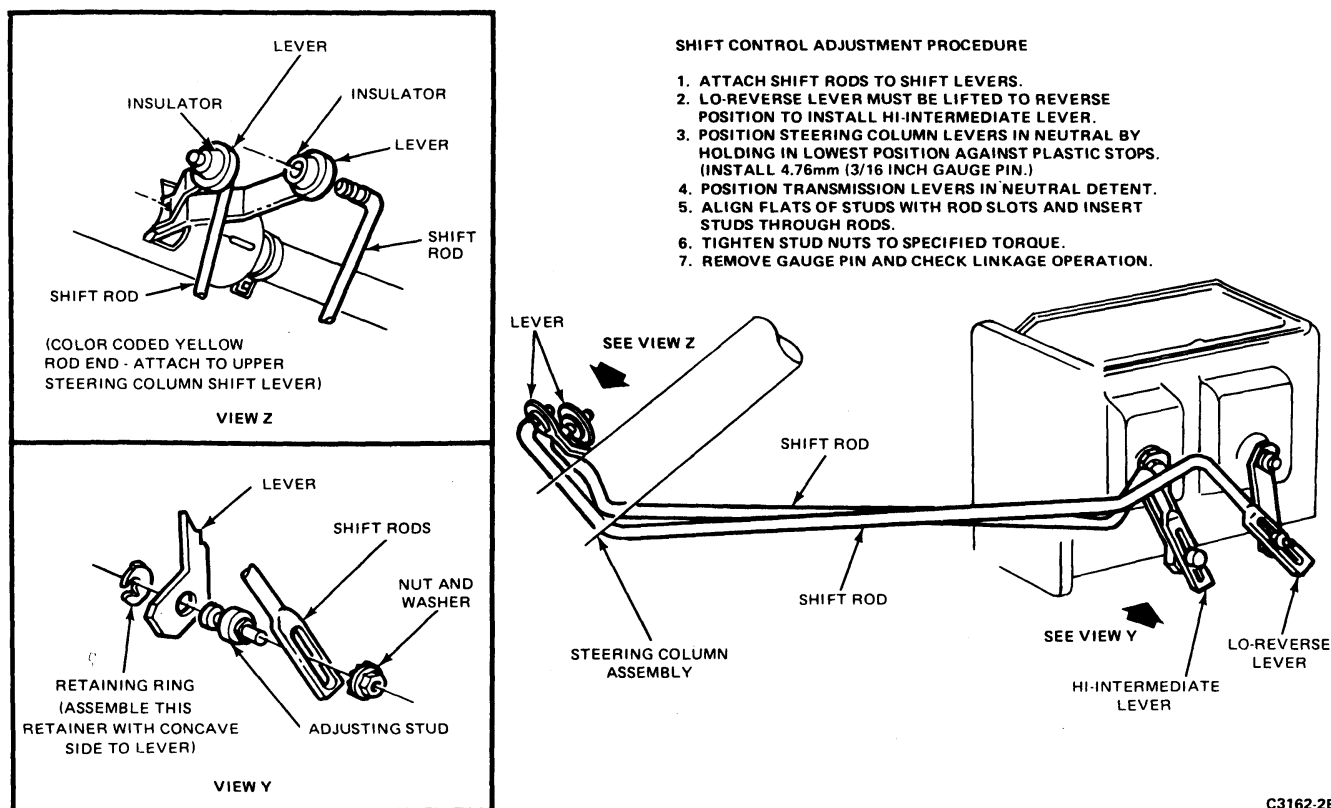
Gearshift Linkage Adjustment—E-100—E-350
